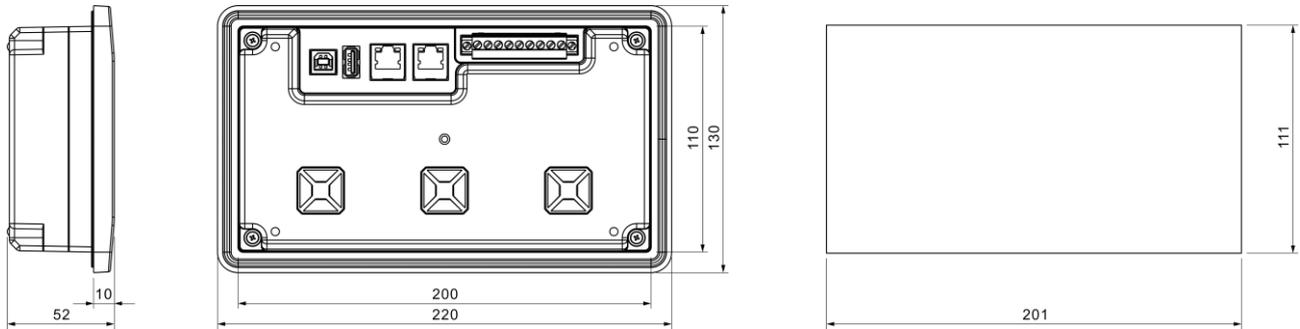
HGM8510D Installation and Cutout Dimensions (Unit: mm)
